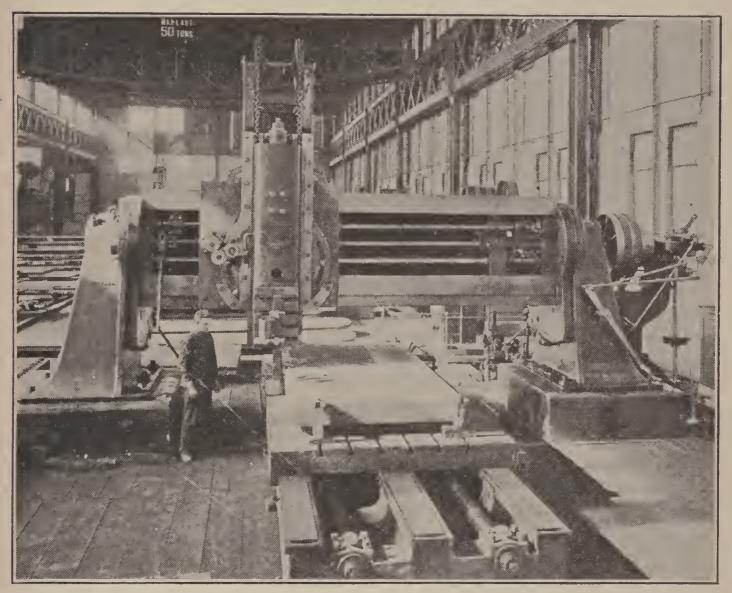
Universal armor-plate planing, cross-planing, and slotting machine, Witkowitz Works.
